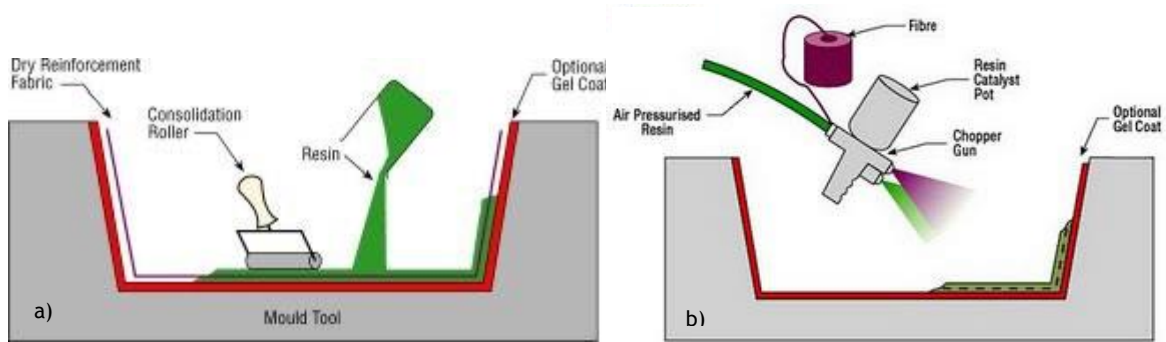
Wet Lay-up (a) and Spray-up (b) [26].
